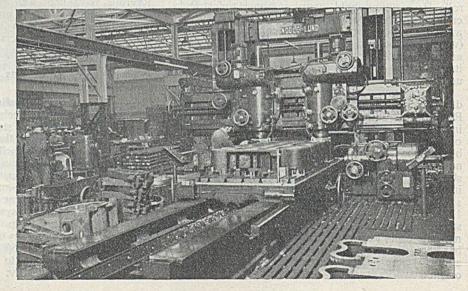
Planer-miller Machining a Large Circuit-breaker Topplate Casting at the New Town Works of A. Reyrolle & Company, Limited.
